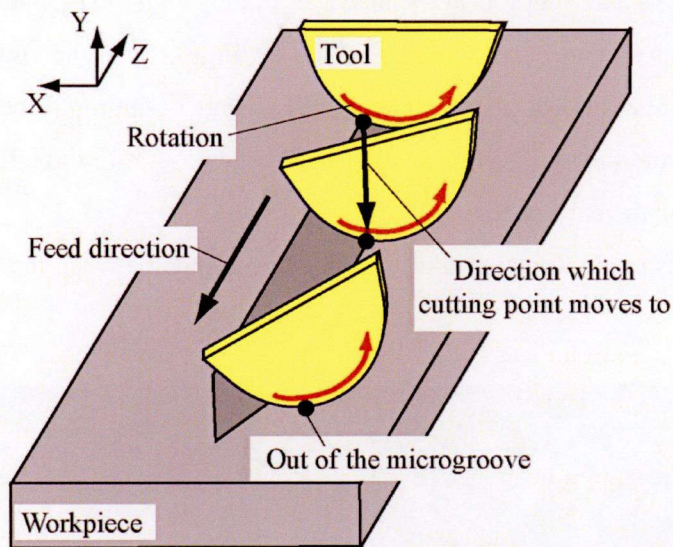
Increase in the contact distance between flank face and workpiece
